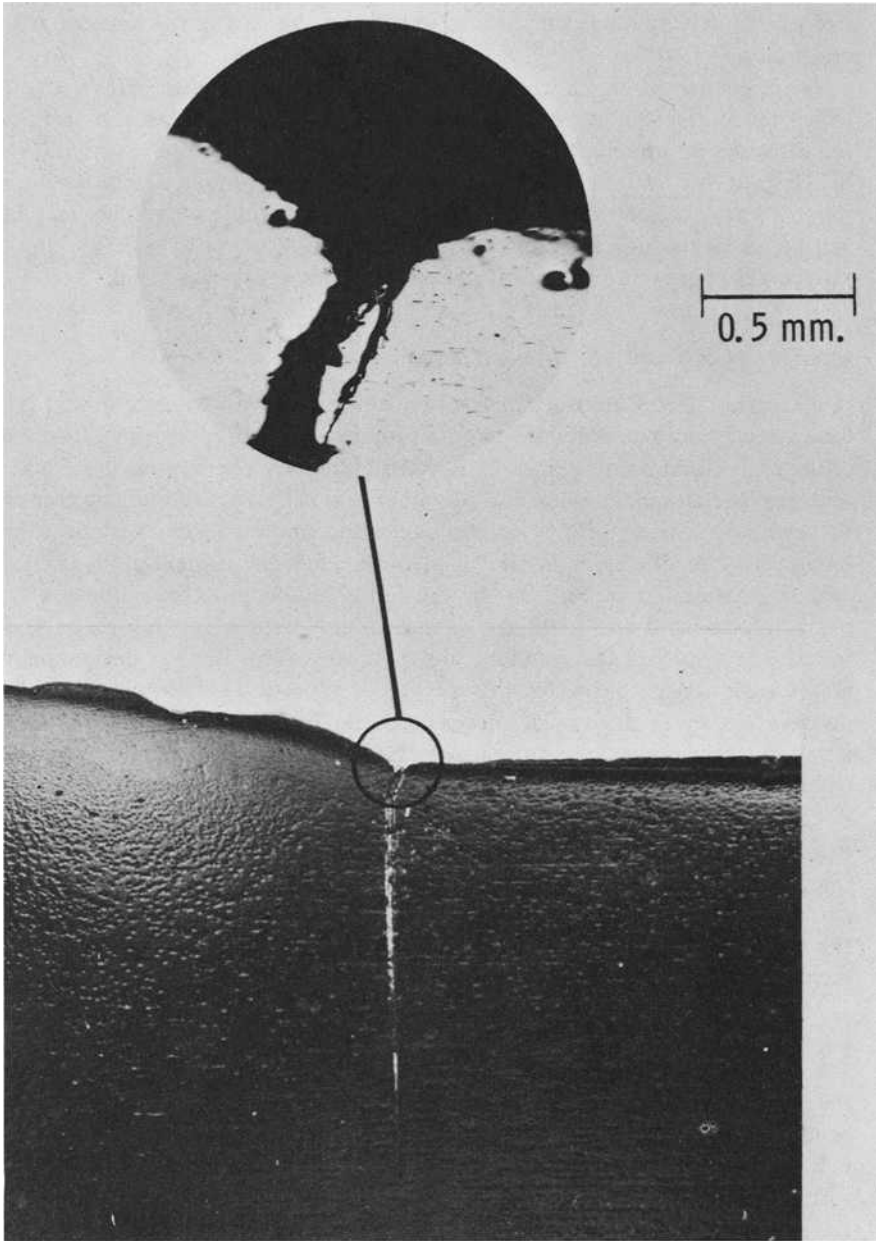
Appearance of typical section through cracked portion of the specimen which failed at 27×10^6 cycles. Note undercutting at weld toe.
